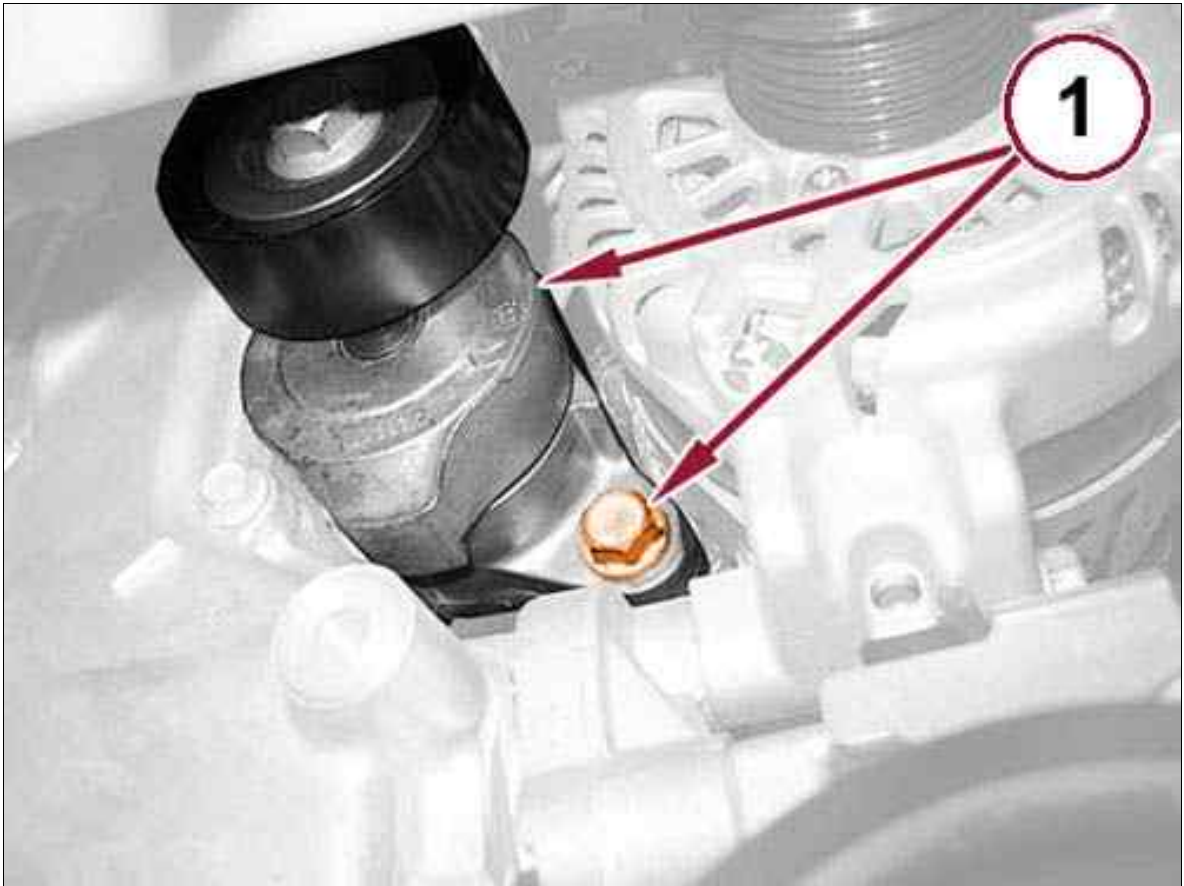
Accessory Drive Belt Tensioner Top Bolt
